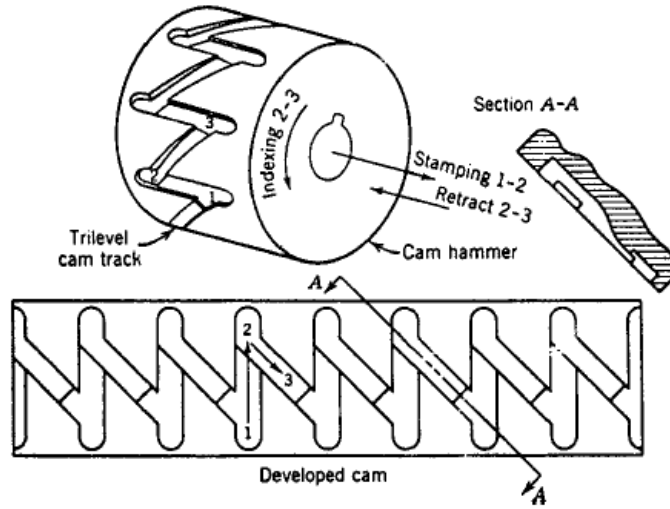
Exploded view detailing a design of an indexing cam (reproduced from [Sclater, 2011])
